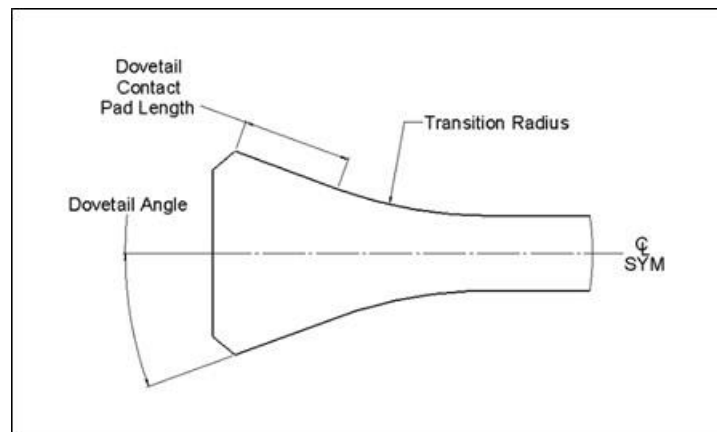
Schematic Of Dovetail Section of Subelement Test Specimen
